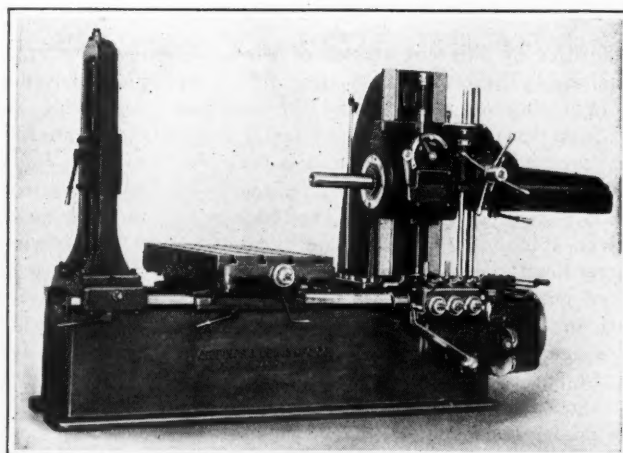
No. 45 Horizontal Boring, Drilling, and Milling Machine built by the Giddings & Lewis Mfg. Co.
